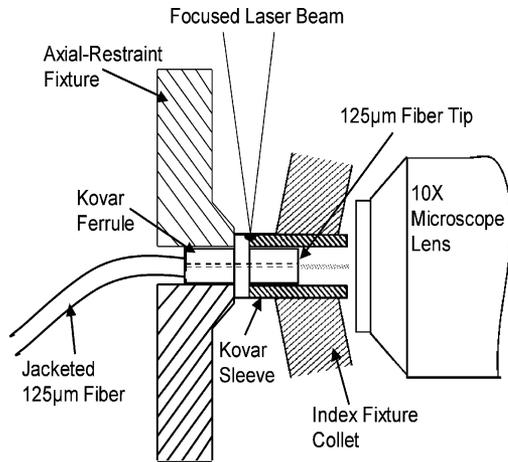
Experimental setup for spot welding, restraint application, part rotation, and camera imaging of post weld shift.
